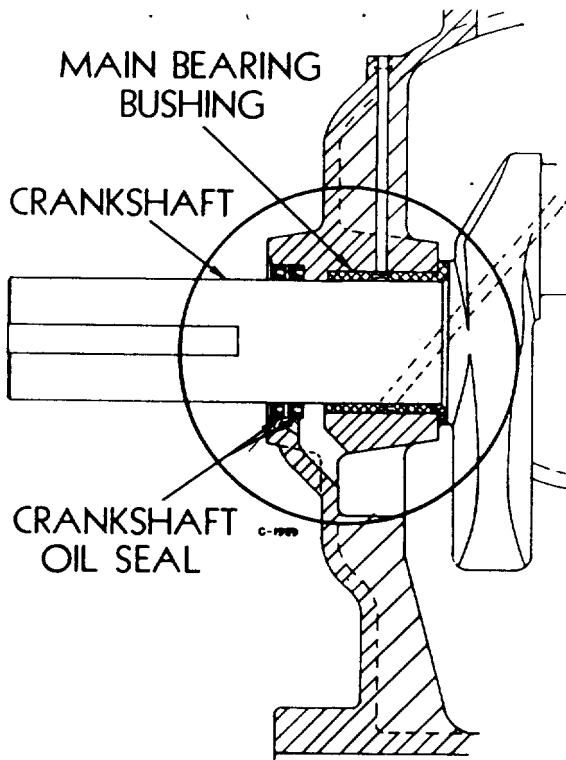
Cross-Section of 7" Stroke Oil Seal Assembly
